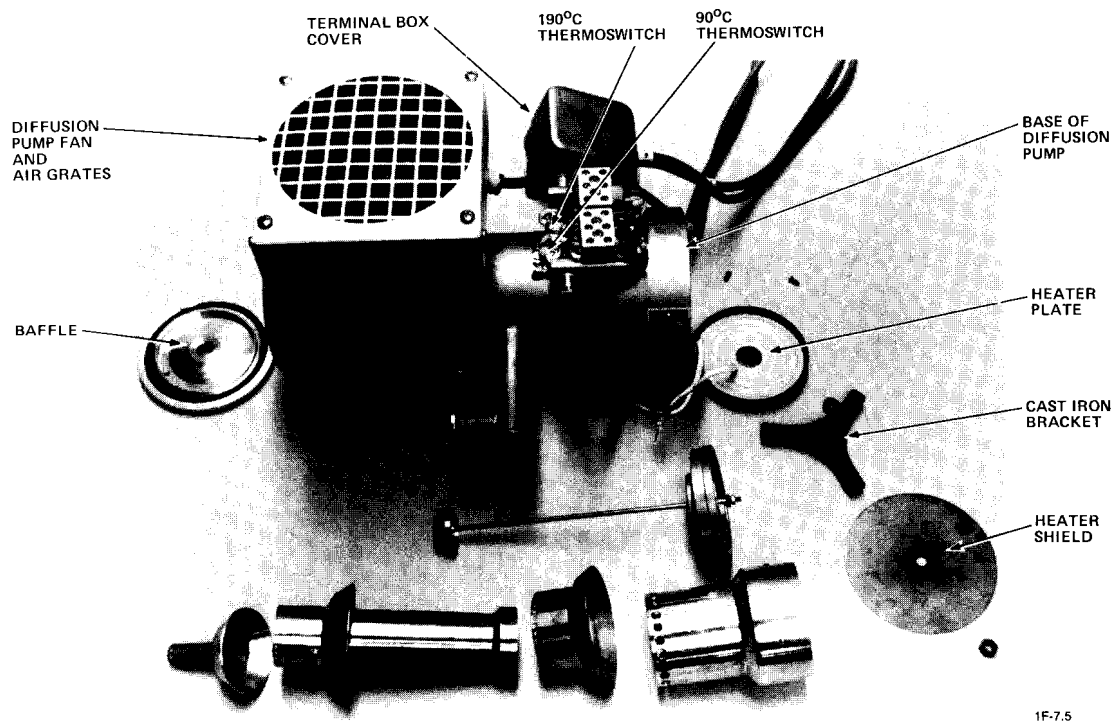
Diffusion Pump with Heater Plate Removed
